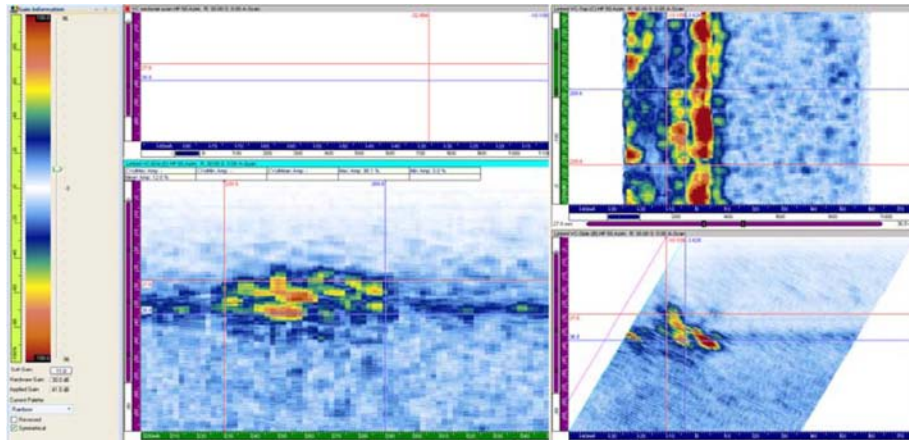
Specimen 9C-034 Flaw 4 After Weld Crown Removal at 1.5 MHz
